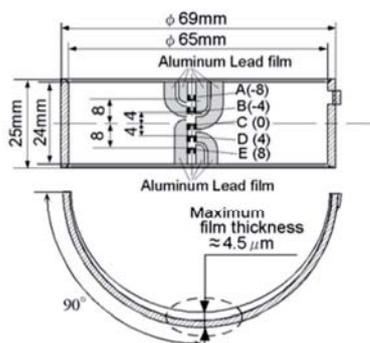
Thin-film pressure sensor on engine connecting rod big-end bearing (Total 5 sensors)
